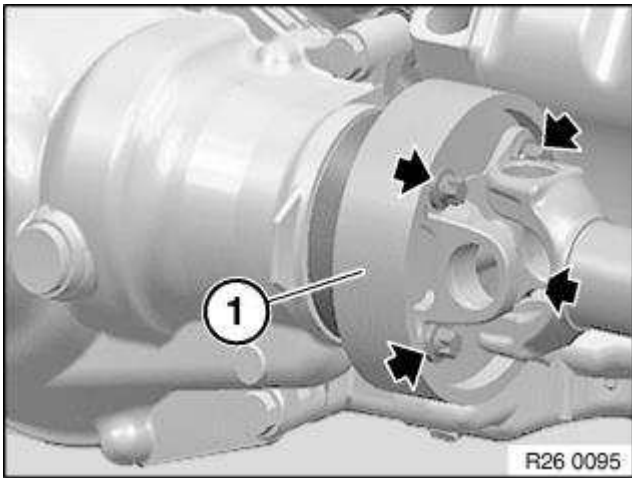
Front Propeller Shaft With Locking Mass (1)
